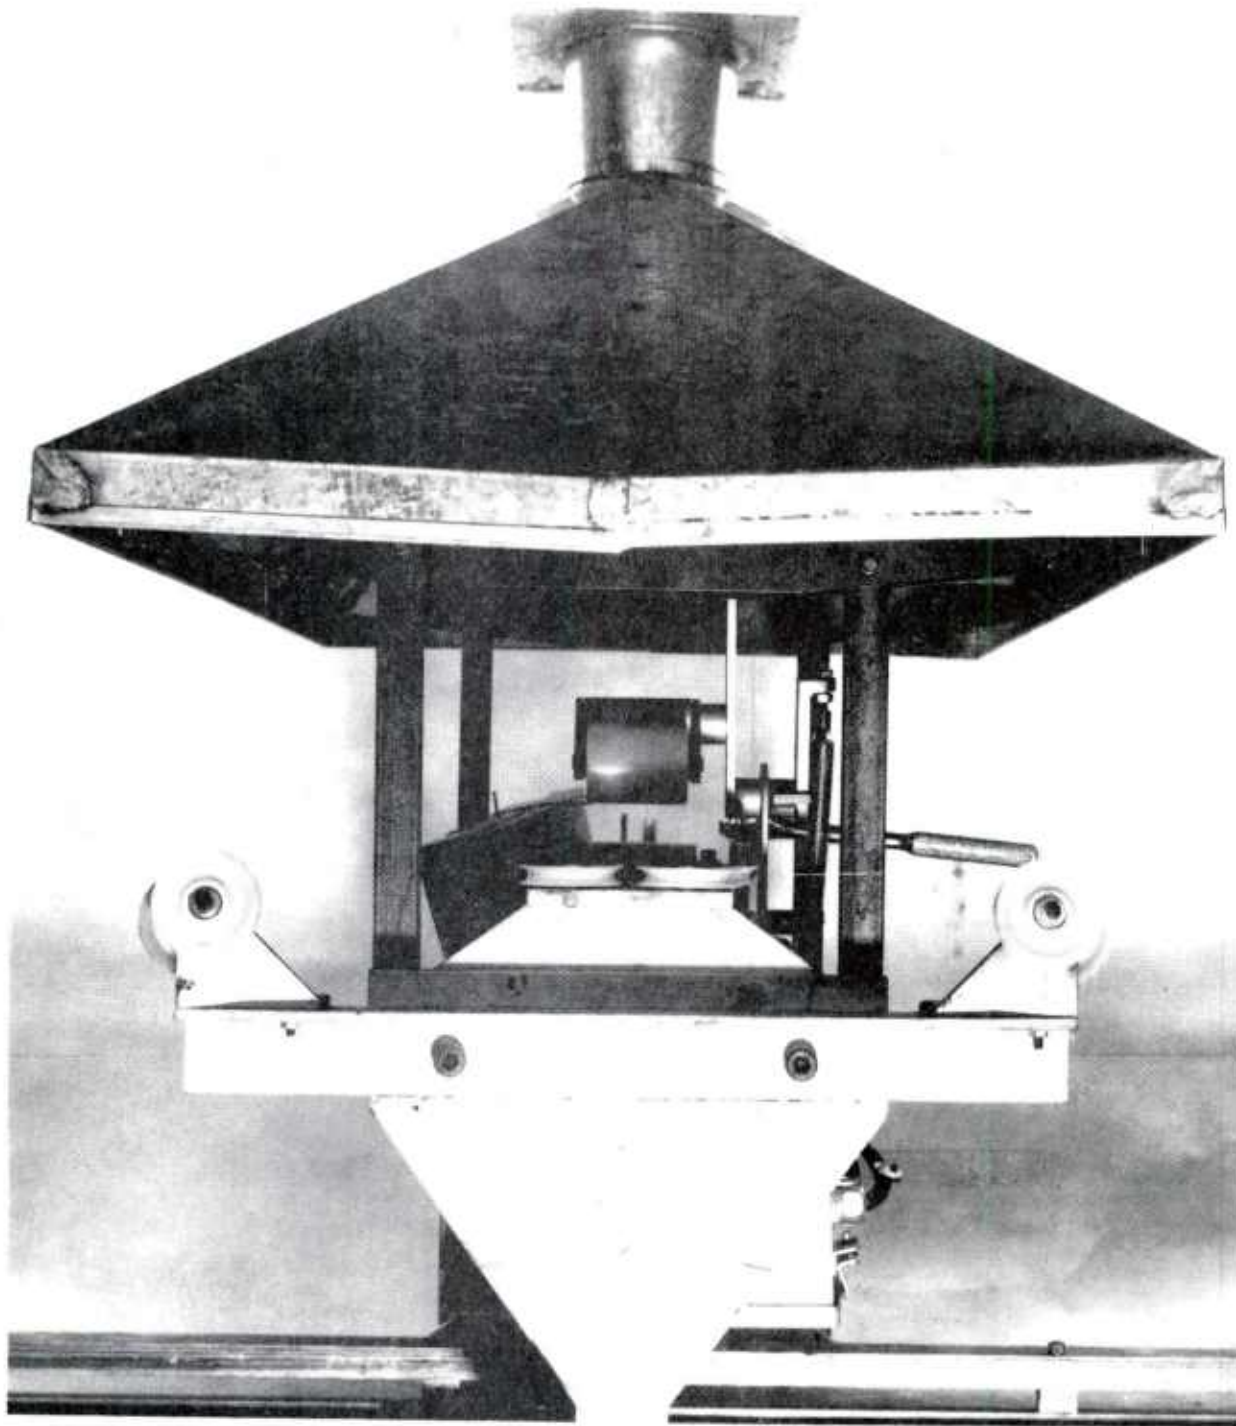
Rear view of carriage top showing path of filaments through the solvent-wipe cleaning process.
